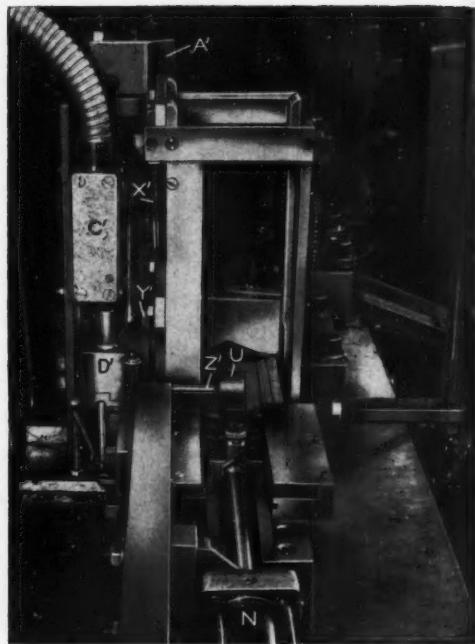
Close-up view of the feed mechanism for the multi-stage tool. A safety device stops the press if the feed motion has not been completed
